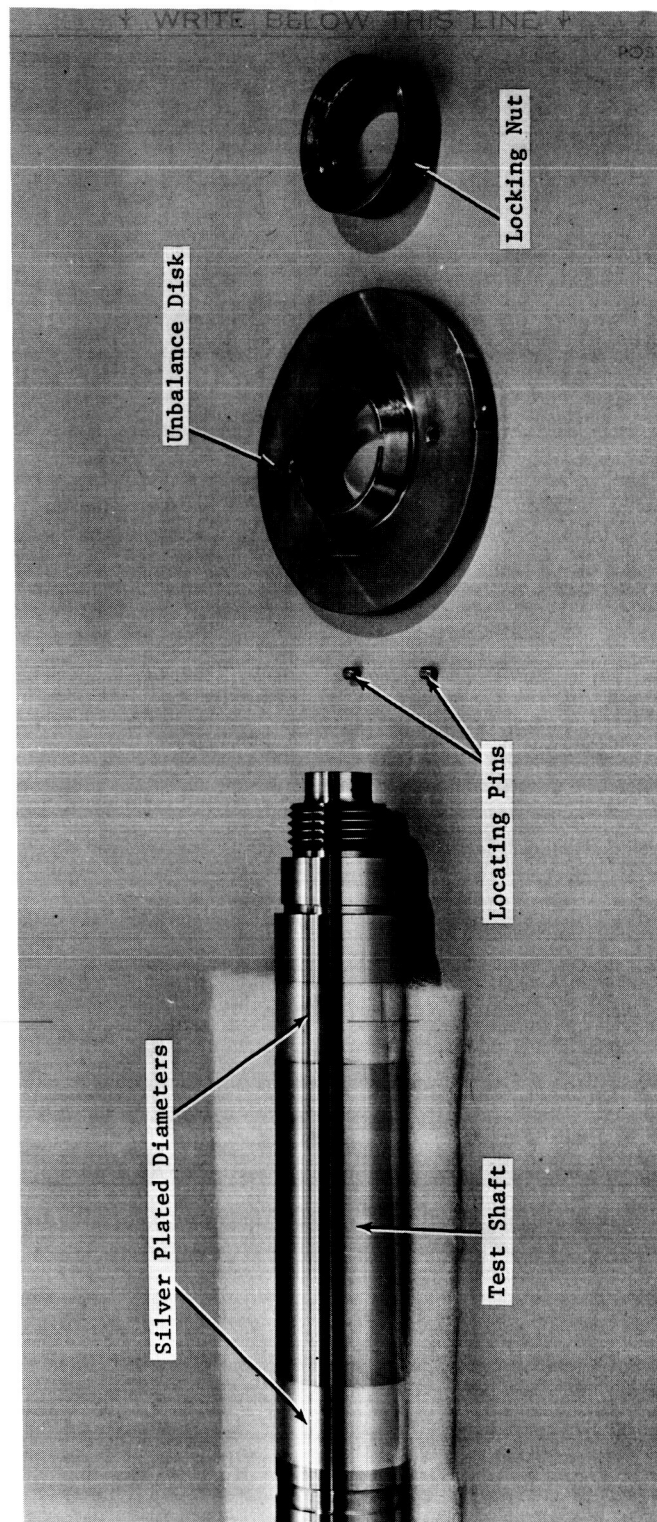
Exploded View of Modified Shaft and New Unbalance Disk.
